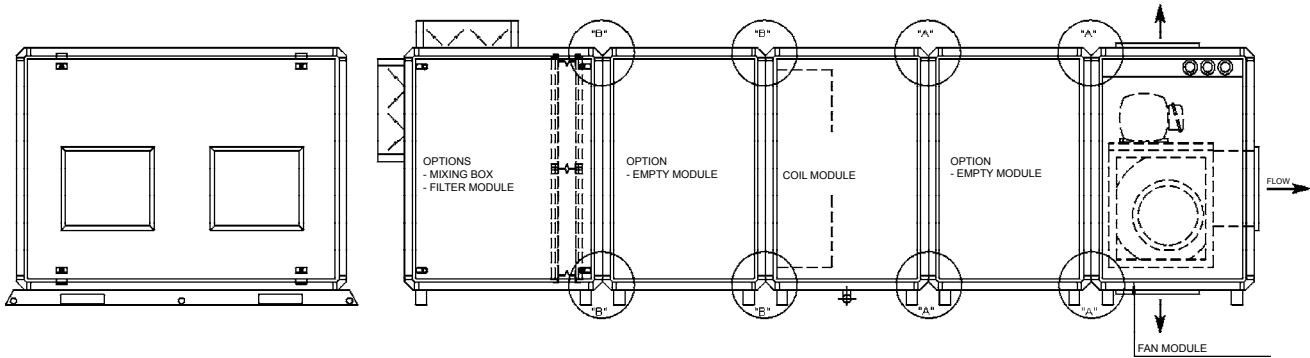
Horizontal/vertical assembly 05 to 50 – DL (Only by design special requiring)
